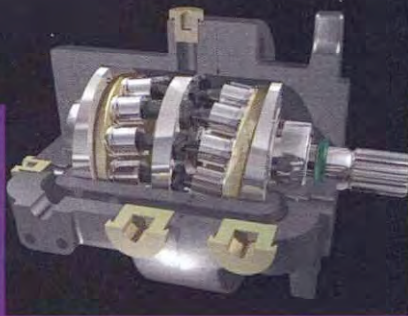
Cutaway view of the first prototype of a floating-cup pump
